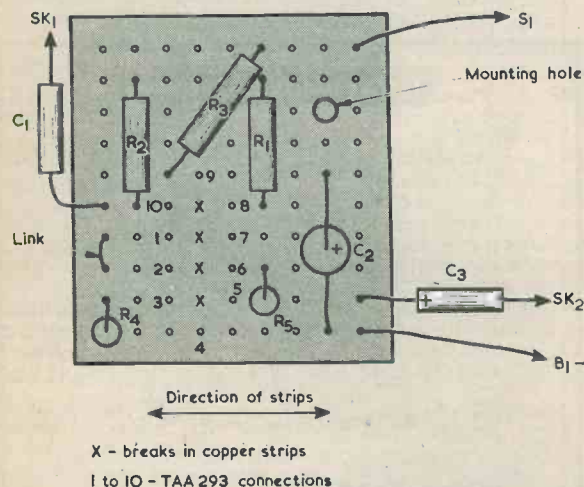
Layout of parts on the Veroboard. This view is of the component side of the board, with the copper strips underneath
